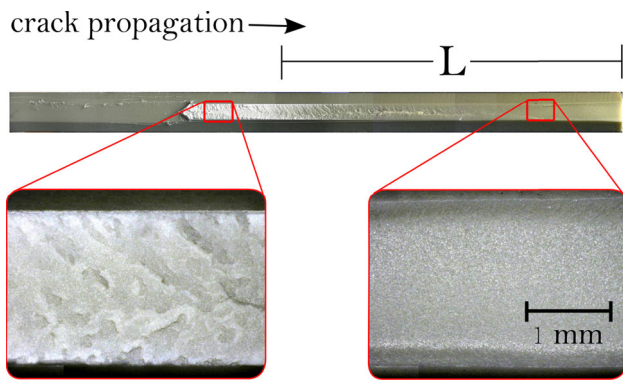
Microscopy image of PP specimen fracture surface. *Left* Surface for slow crack growth after plastic deformation, no measurable EME for this part. *Right* Surface for fast crack propagation with EME, macroscopically smooth. L indicates crack length for brittle failure
